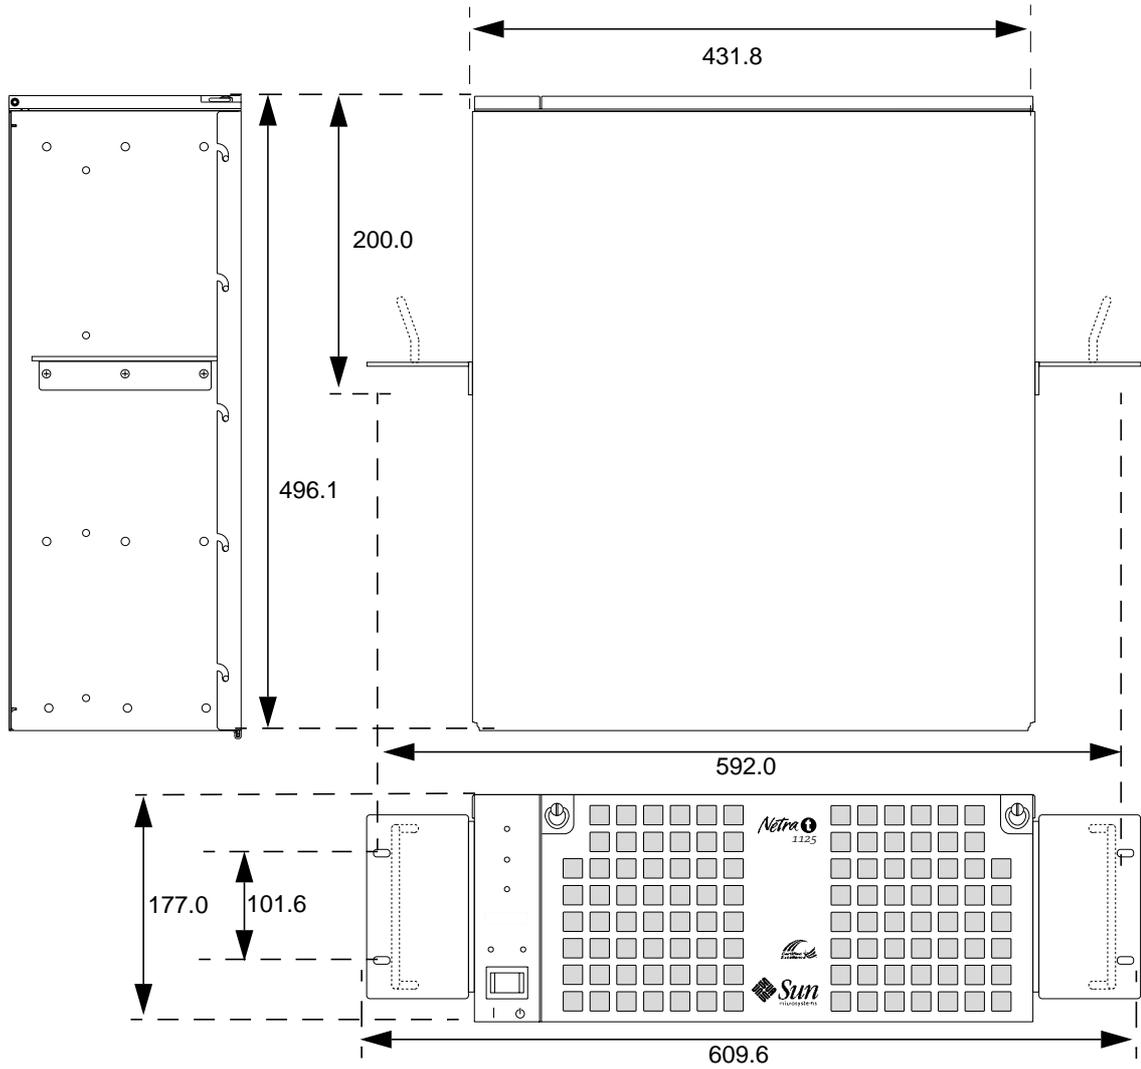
Netra t 1120/1125 24-inch Configuration (all dimensions shown in mm)
